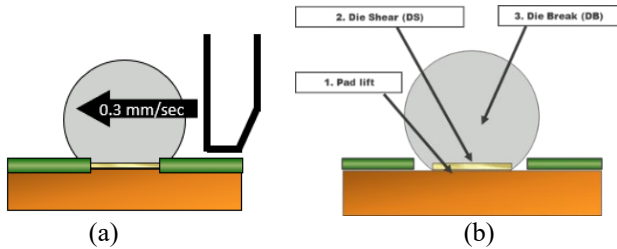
Ball shear (a) setup and (b) failure mechanism.
